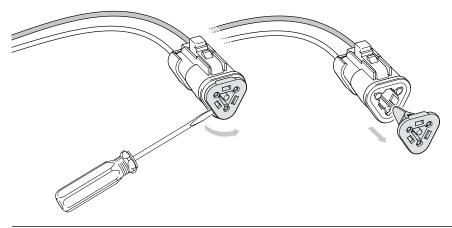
Deutsch plug, green/blue wedge lock removal.
